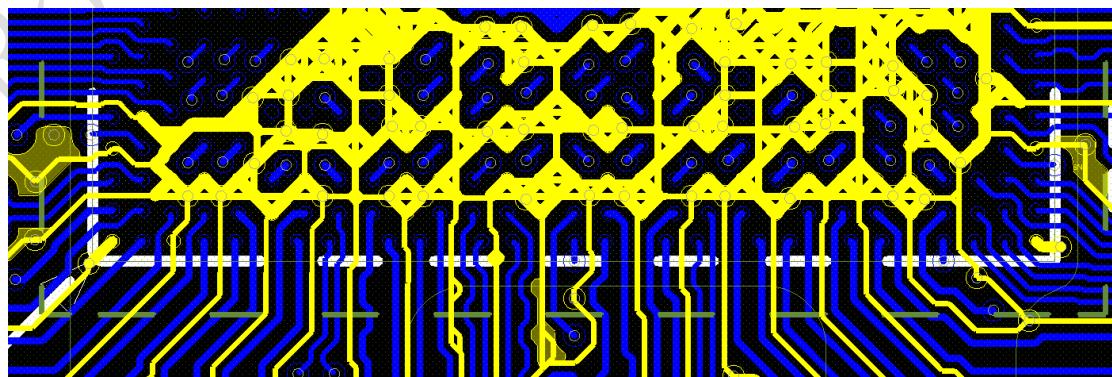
vias design of 6-layer PTH PCB template SOC area
